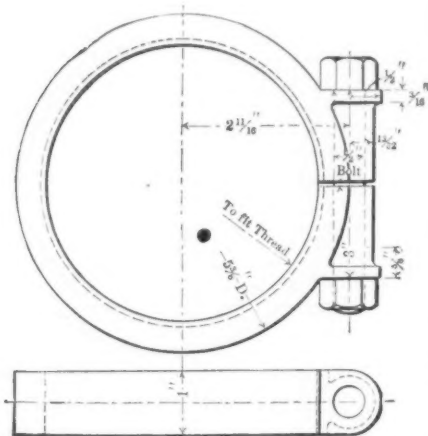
Stop-Ring of Valve, Fig. 9.
